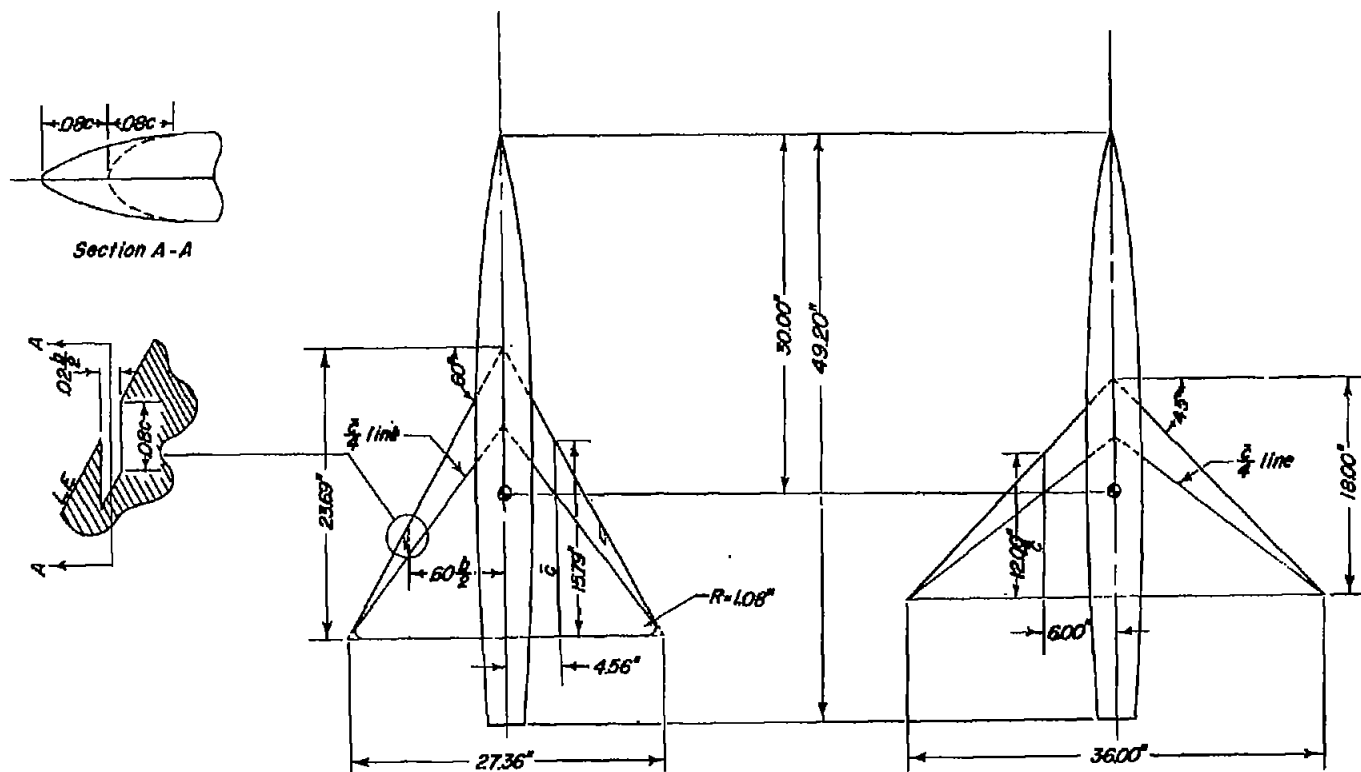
Plan form of models and details of notch in the leading edge of the 60° wing.
